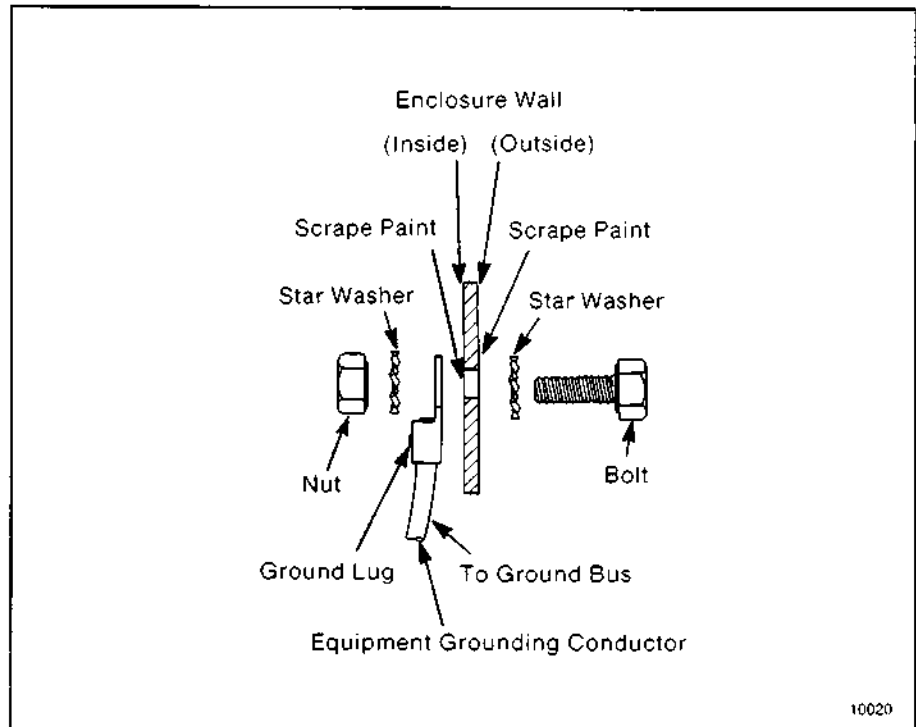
Details of Ground Connections at Enclosure Wall
